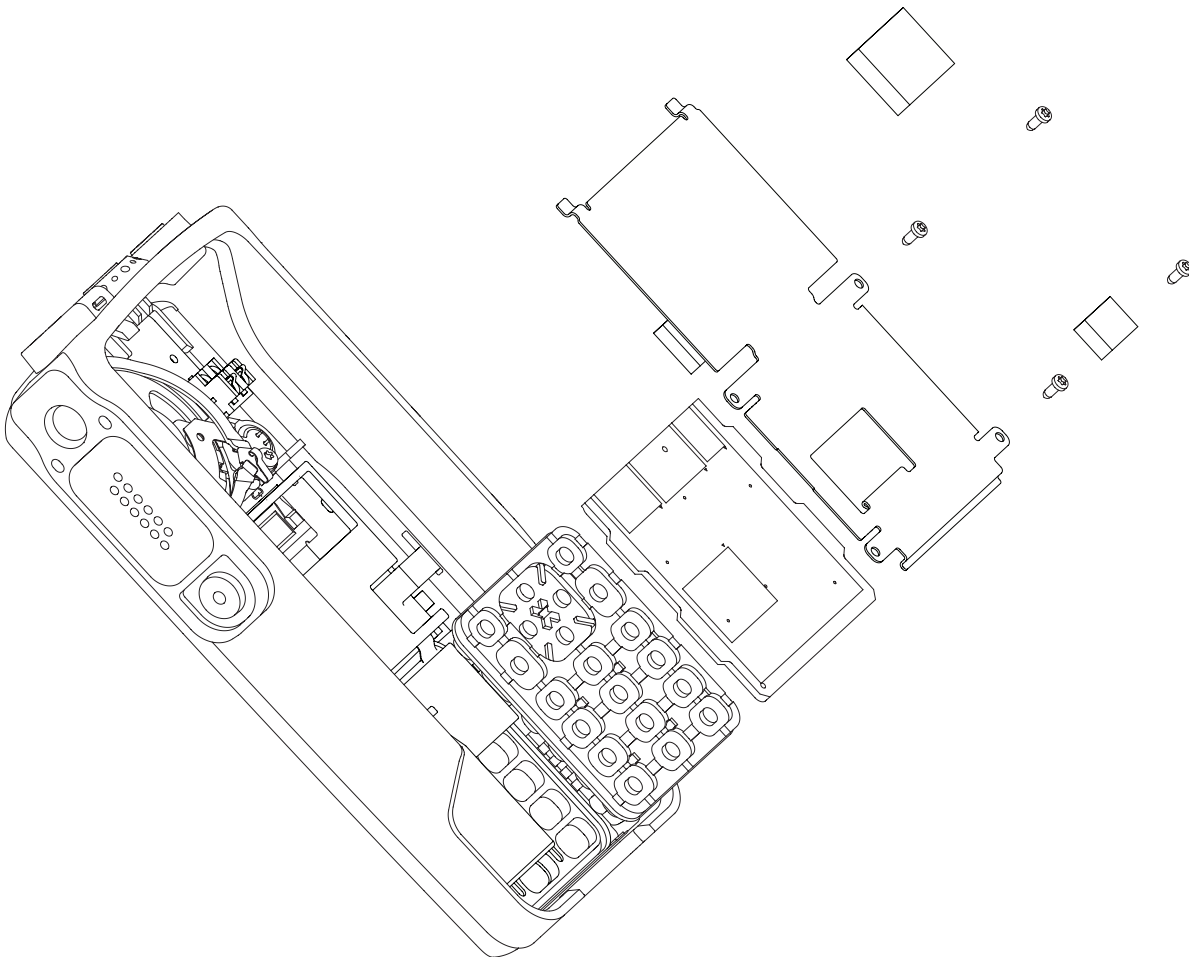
Keypad, Display, and Keypad Board disassembly for Full Keypad
